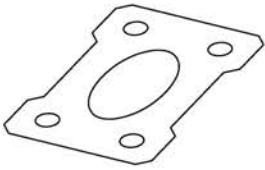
First example – 2D outlines in 3D space – the outline in the Isometric view
